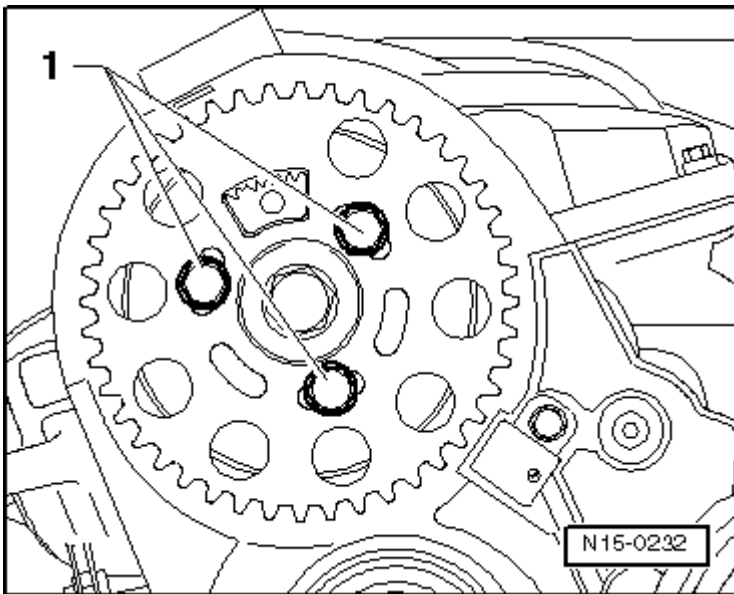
Identifying Camshaft Pulley Securing Bolts
